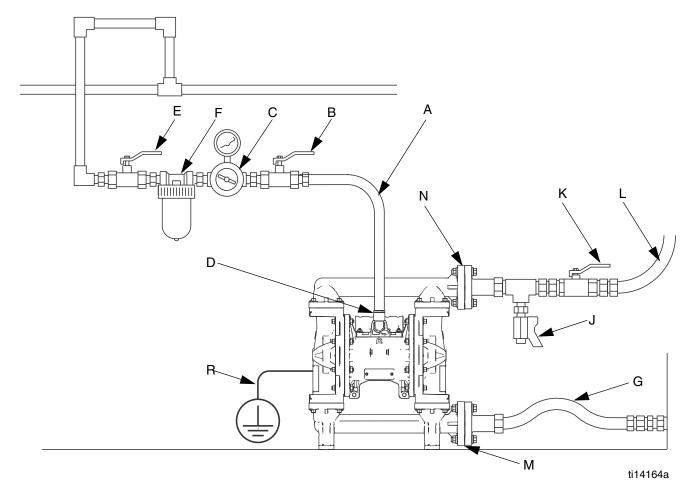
Typical floor-mount installation (polypropylene, 1050P, pump shown)
